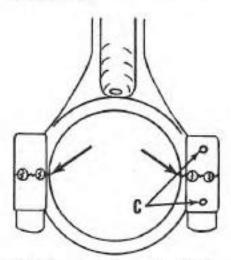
Uneven fractured parting line of rod and cap (shown by arrows) assures positive fit after assembly. Be sure correlation marks (C) are aligned.
